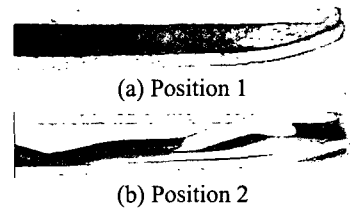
Sheared surface of resistance-welded ISB sheet metal (CEM 150°)
